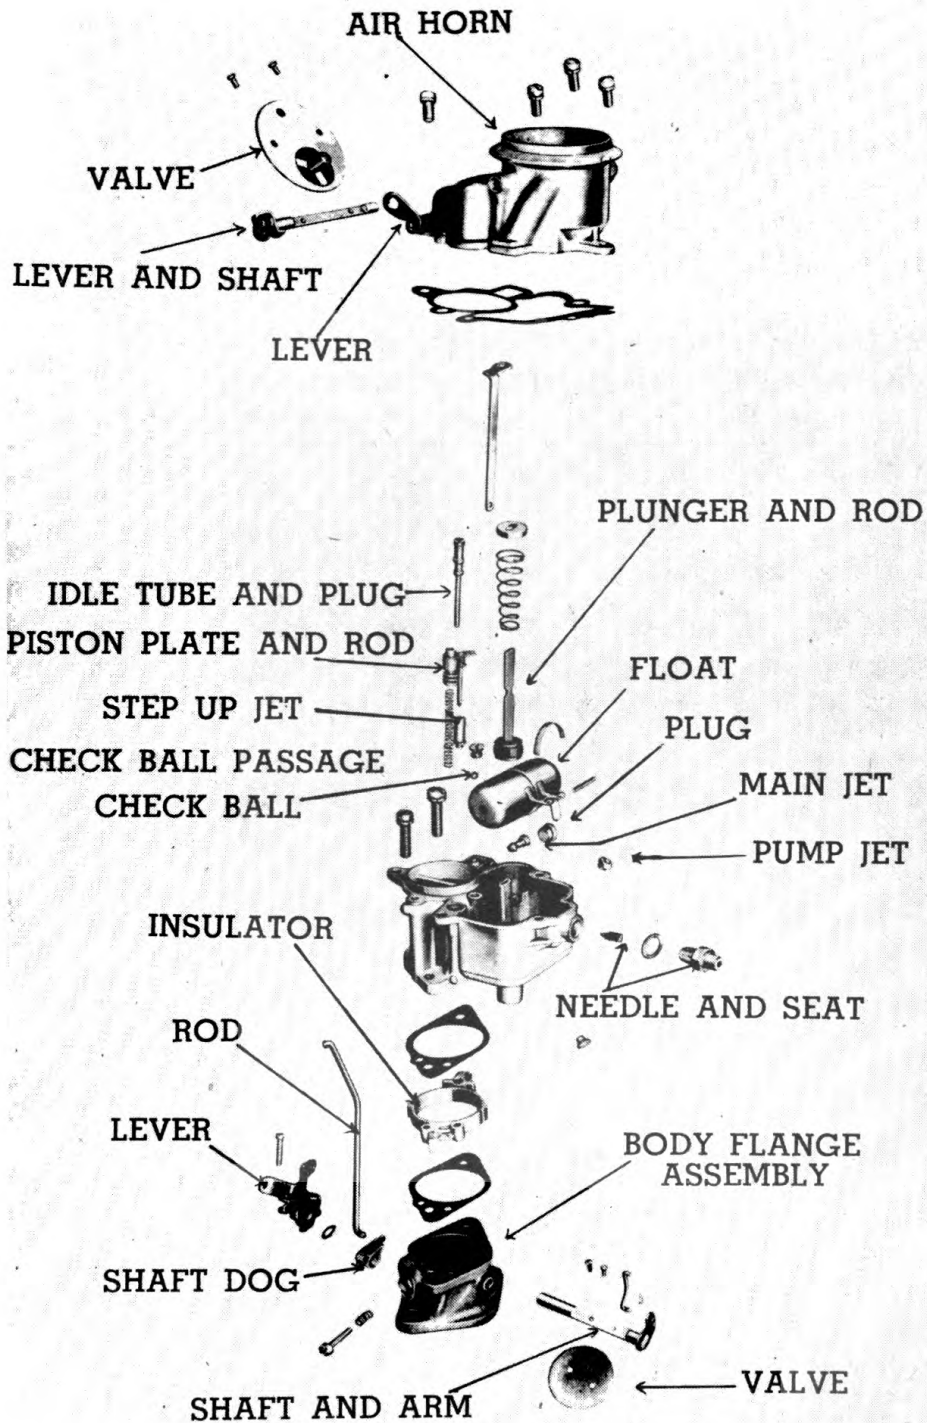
Exploded View of Carburetor Showing Order of Assembly
